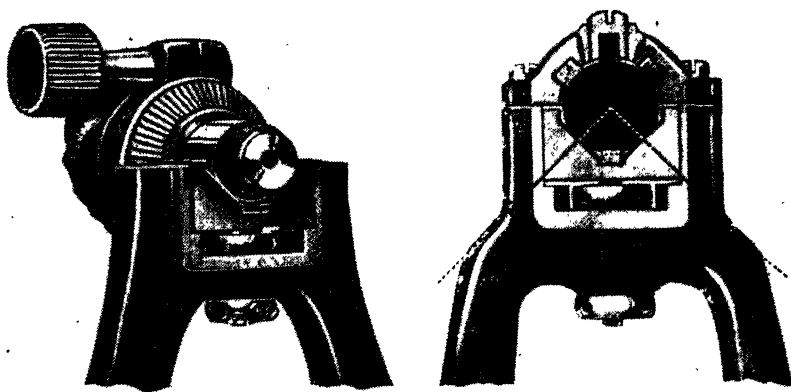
The type of bearing for the horizontal axis used by C. L. Berger & Sons.
